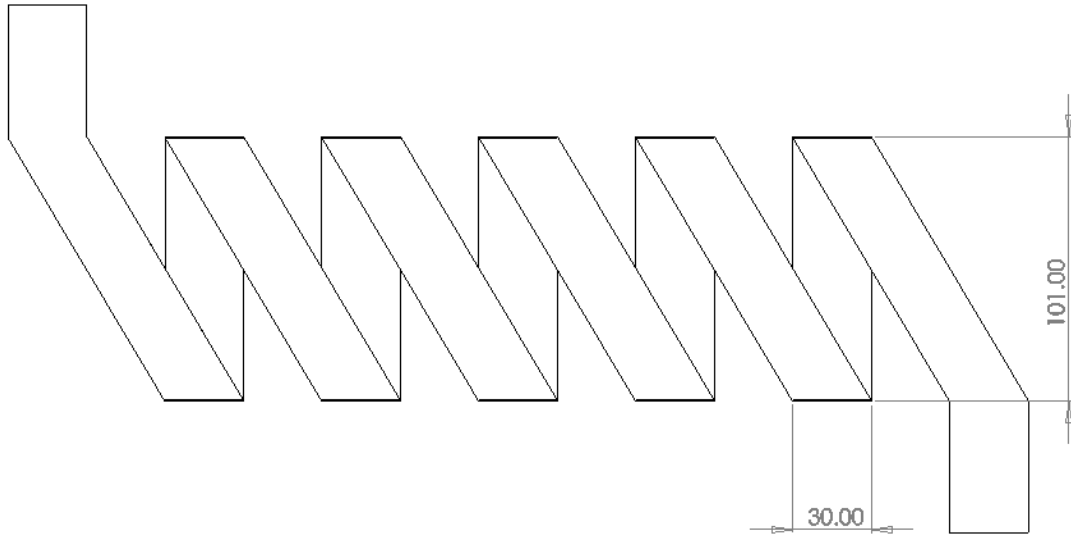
Top view of coil, showing dimensions. Dimensions are in μm . The height of the coil is $15 \mu\text{m}$.
